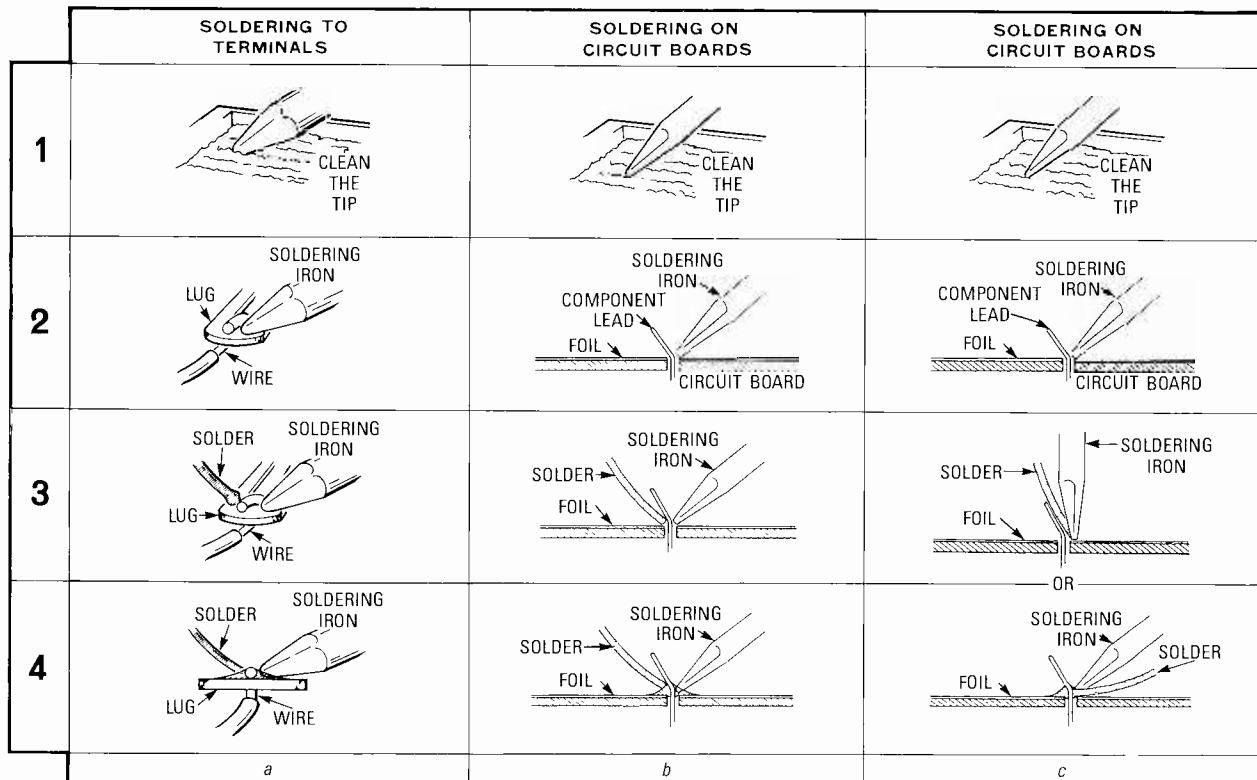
ALTHOUGH IT’S USUAL to heat the material to which solder will be applied (a and b), the heat is applied to the solder (c) when soldering hairline printed-circuit traces.
